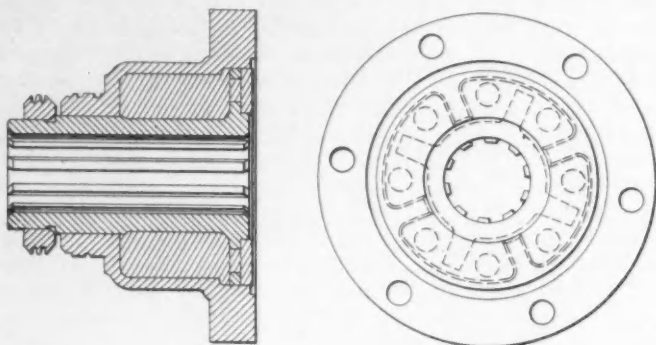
OAKLAND RUBBER-CUSHIONED HUB ASSEMBLY FOR DRIVING PROPELLER-SHAFT
